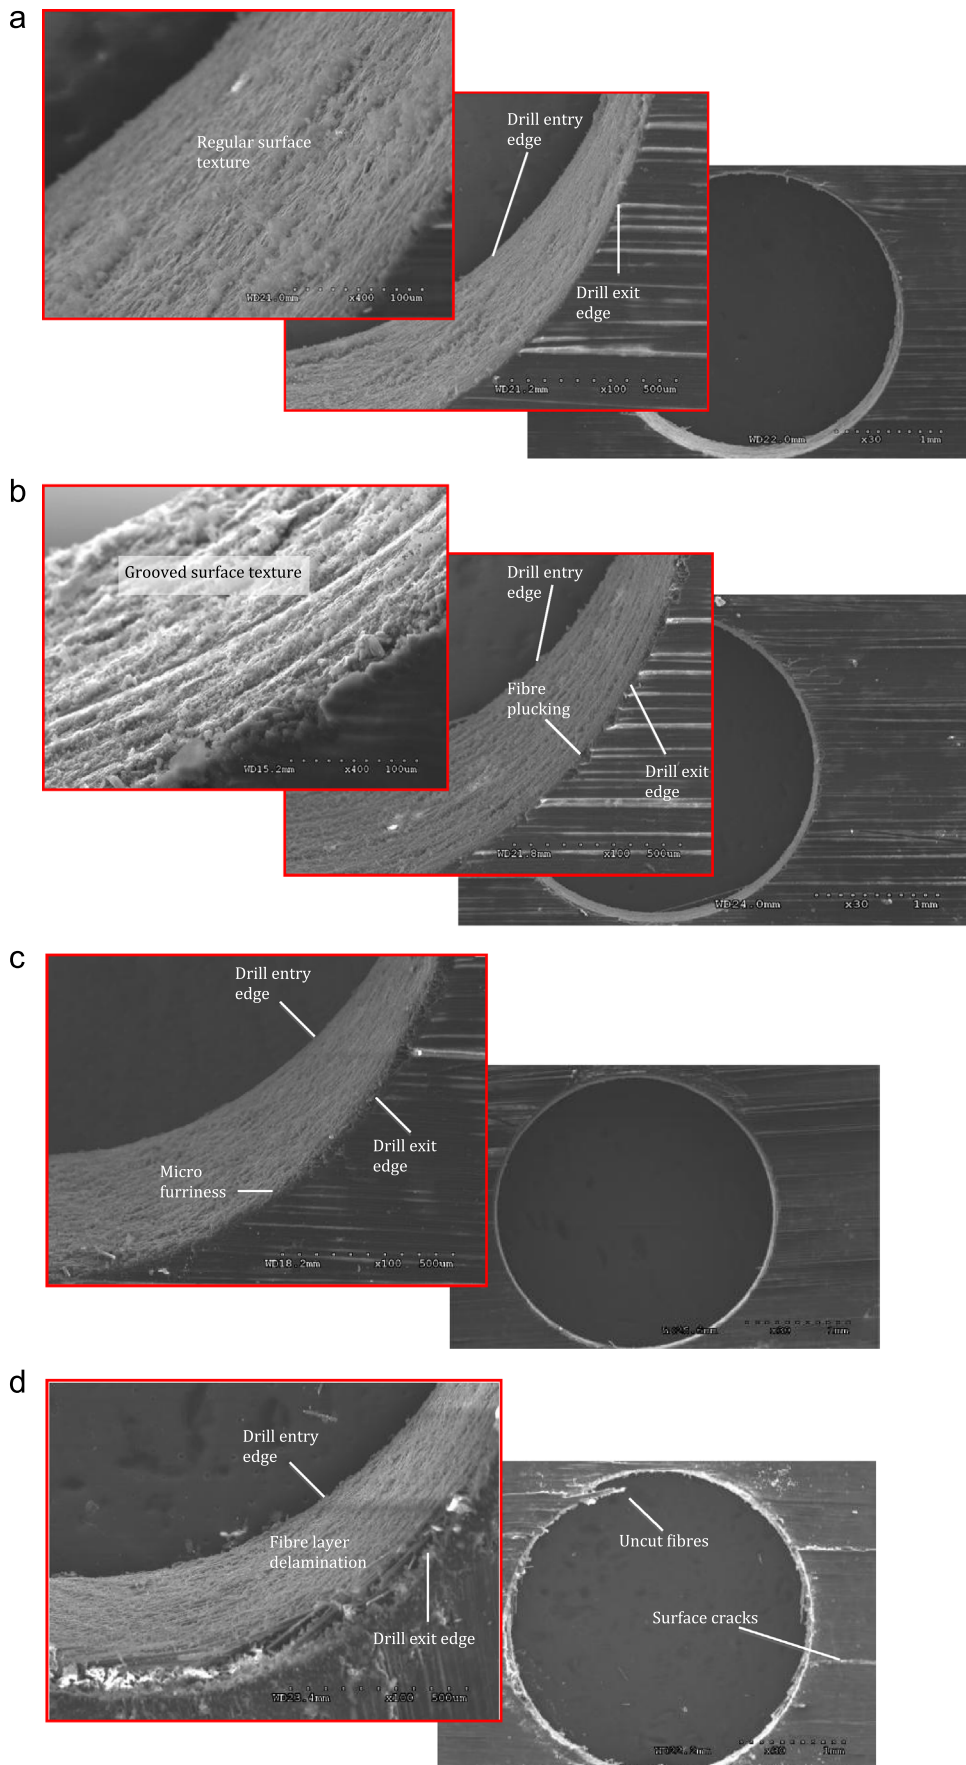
SEM micrographs of micro-core drilled holes in composite plate showing (a) the first hole – PCD drill, (b) the first hole – electroplated diamond drill, (c) the 216th hole – PCD drill and (d) 216 hole – electroplated diamond drill.
